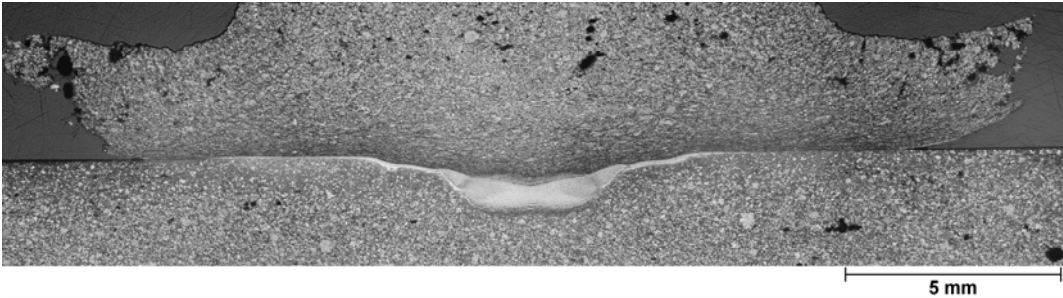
Macrograph of a dissimilar friction stud weld between a magnesium MRI153M and a magnesium AZ91D-T6 plate ^[127].
